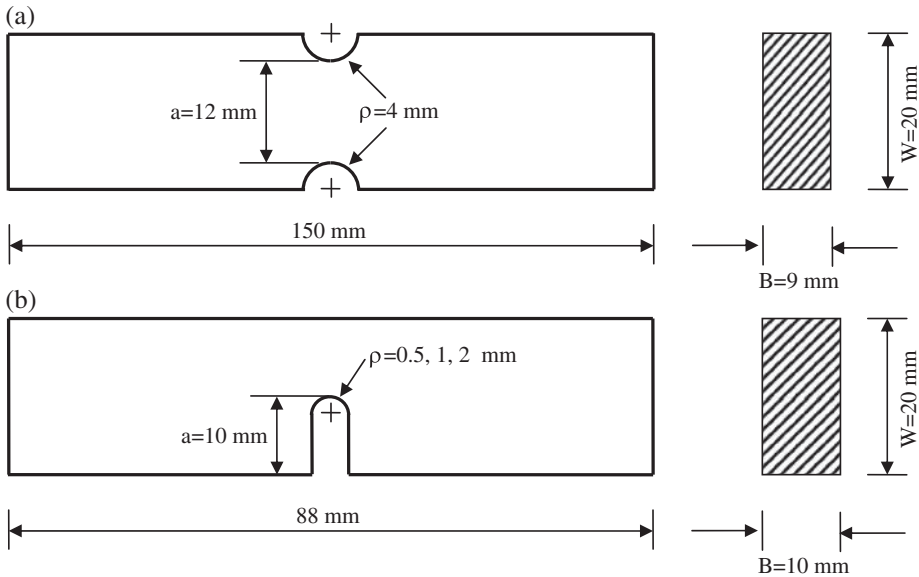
(a) Double Edge Notch Tension (DENT) specimens and (b) Single Edge Notch Bending (SENB) used in the tests.
